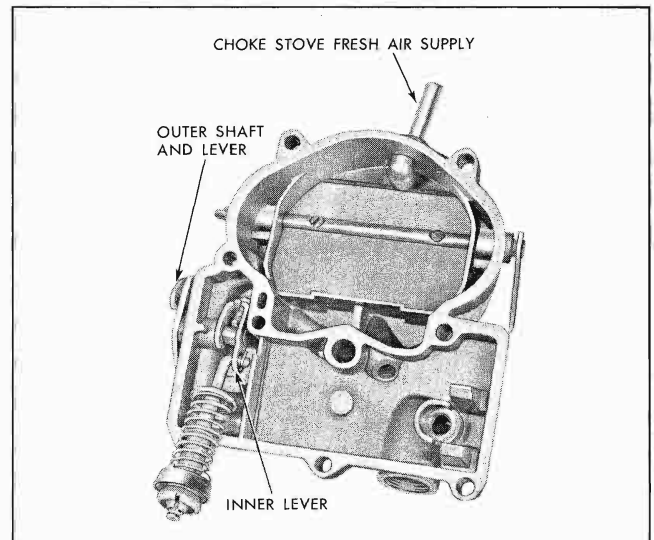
B-31 Pump Plunger Installed on Bowl Cover
